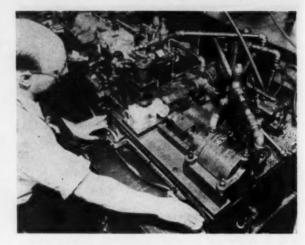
An air operated fixture in which 3-way broaching operation removes flash from holes and trims the contour of thermostat housing.
